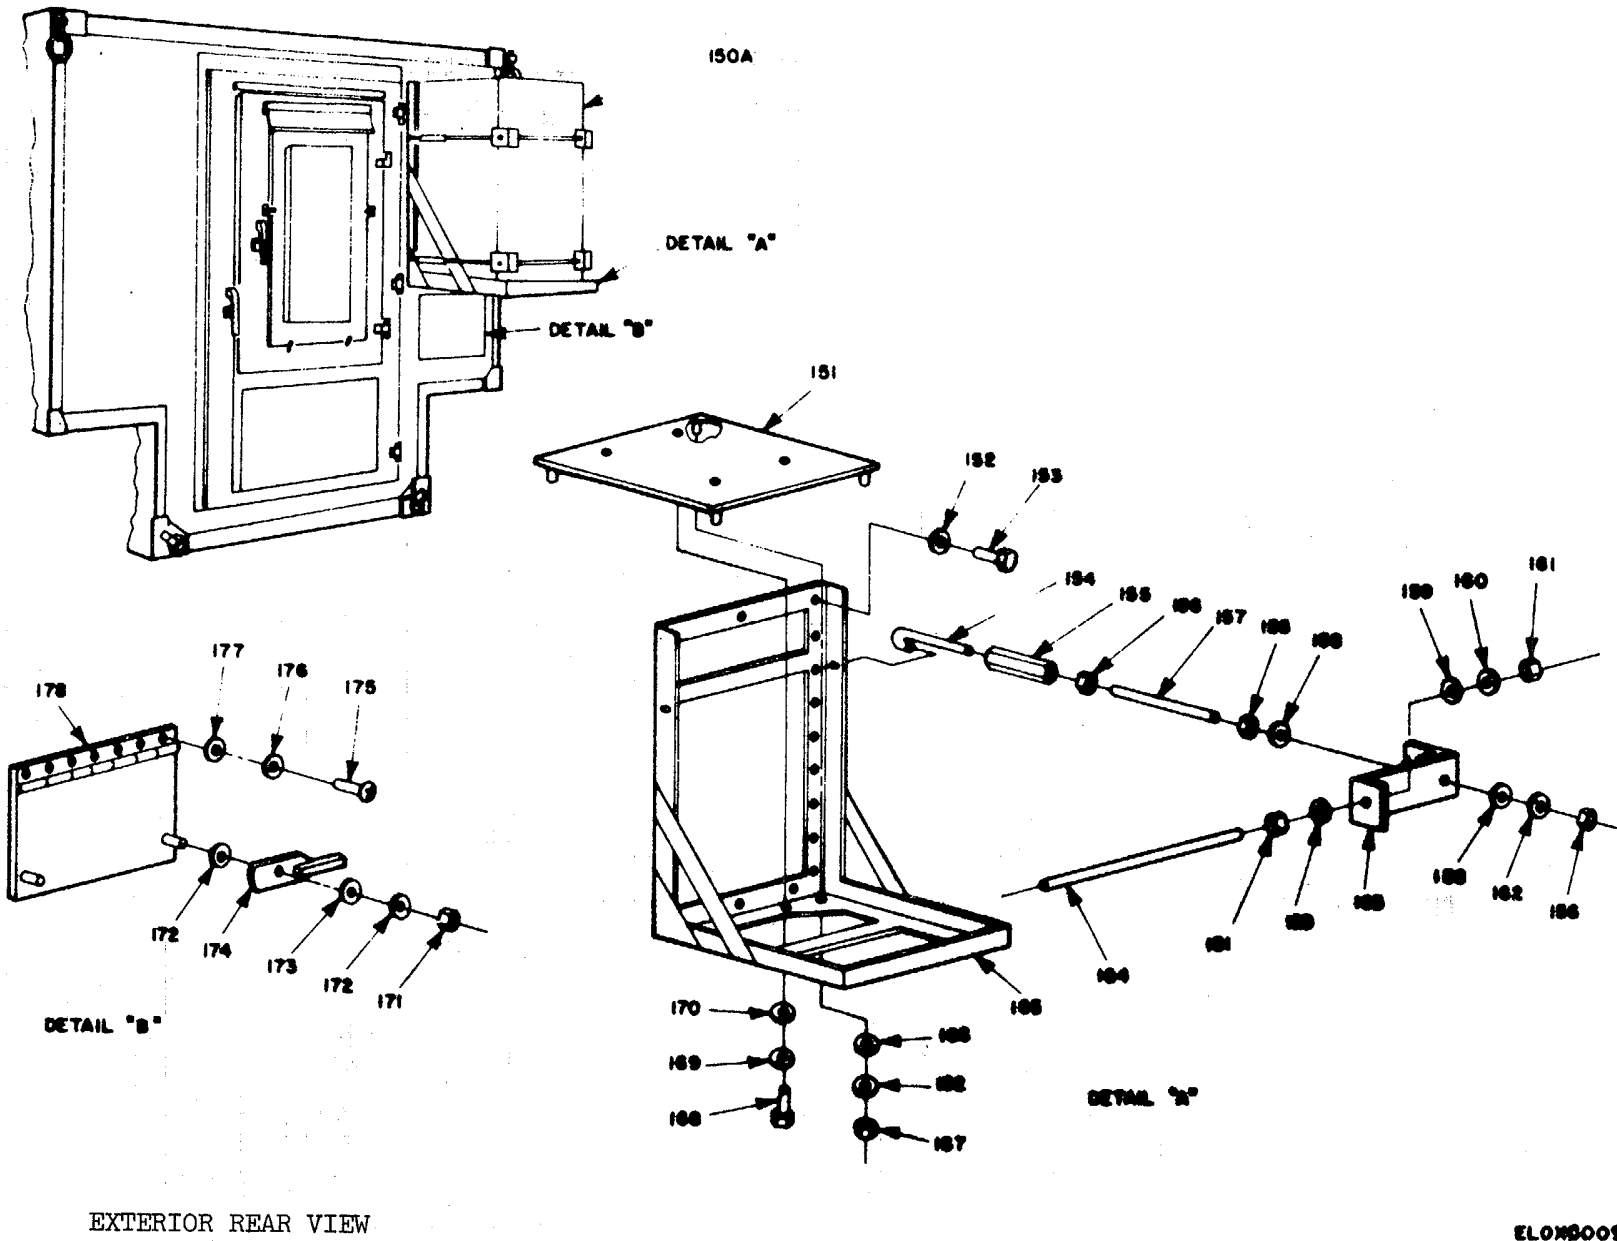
Shelter Electrical Equipment S-561/TTC-41(V) (Sheet 7 of 7)
